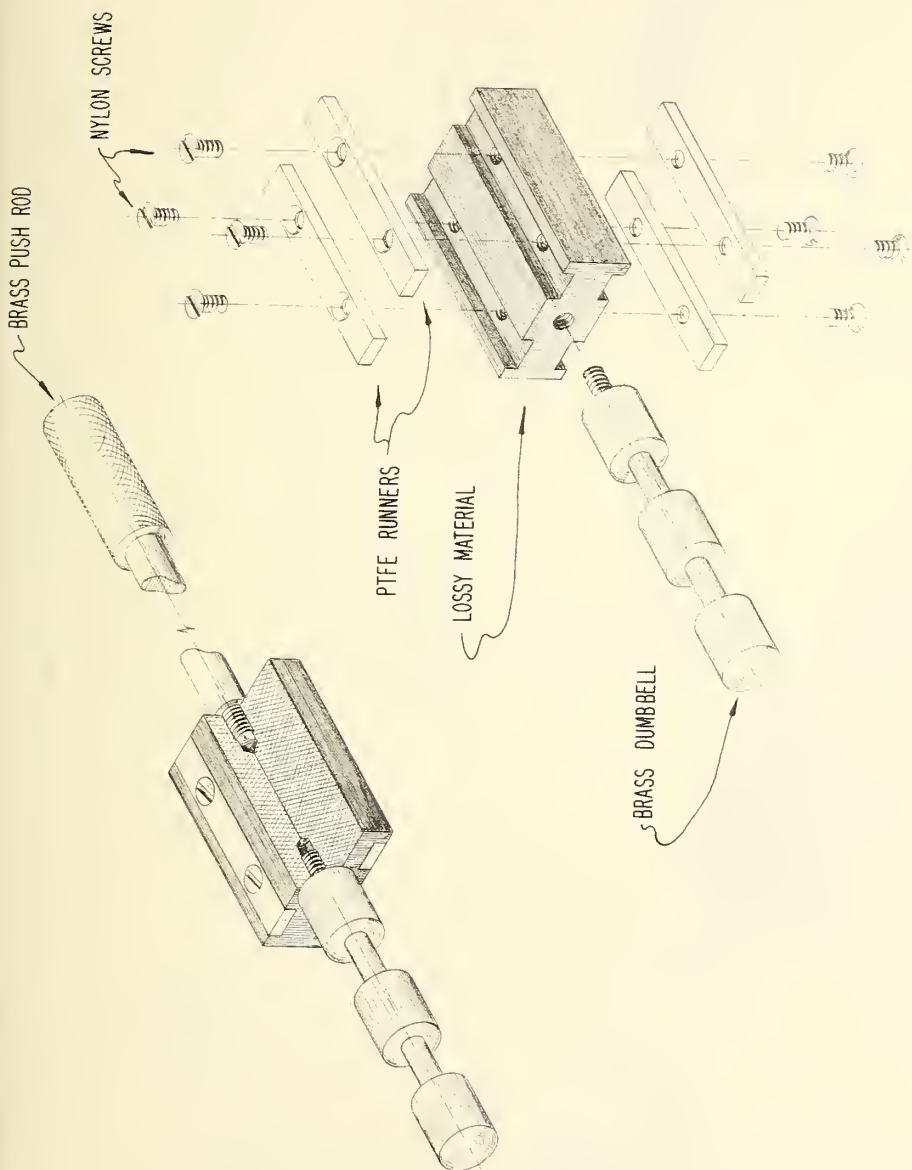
Assembled and exploded views of a sliding short with a three-section dumbbell and PTFE runners.
